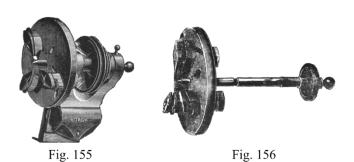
Mandrel Head-Stock Fig. 156 – Mandrel Accessory
